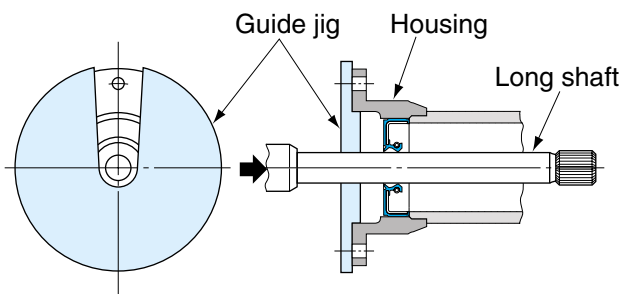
Guide jig for inserting of long shaft into seal bore
